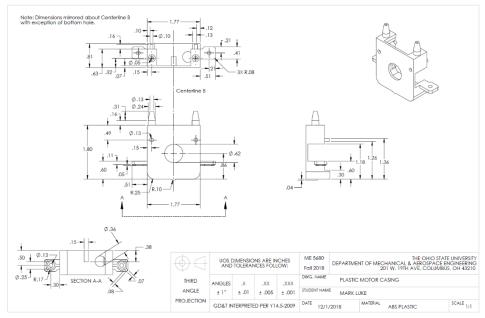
Detailed part drawing of the "Plastic Motor Casing" RL BOM # 14 & SW BOM # 11
